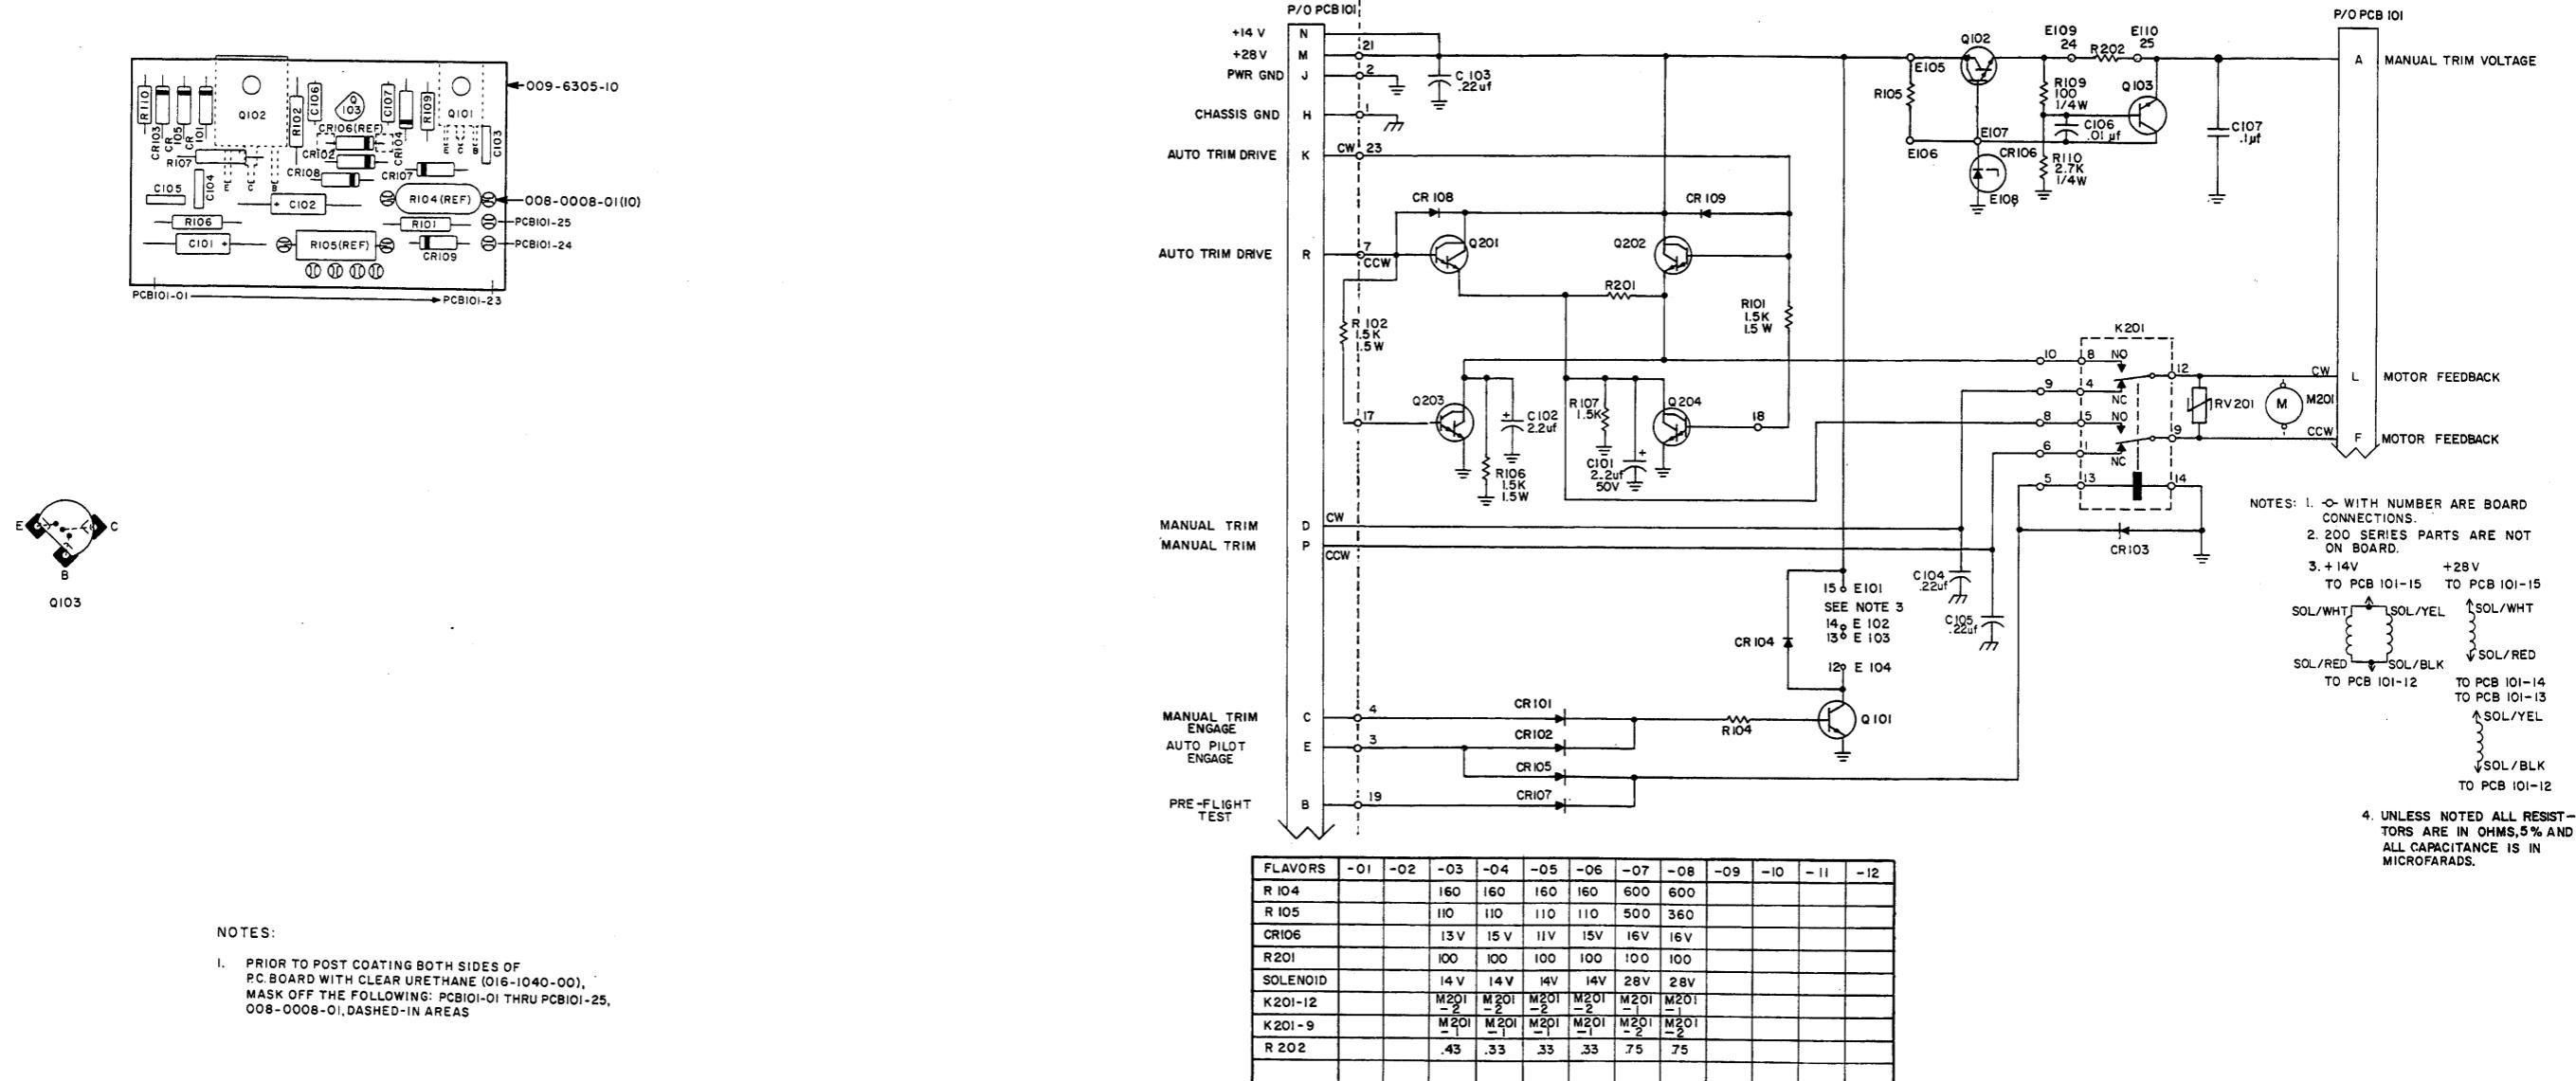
KS 179 PITCH TRIM SERVO PC BOARD ASSEMBLY AND SCHEMATIC
